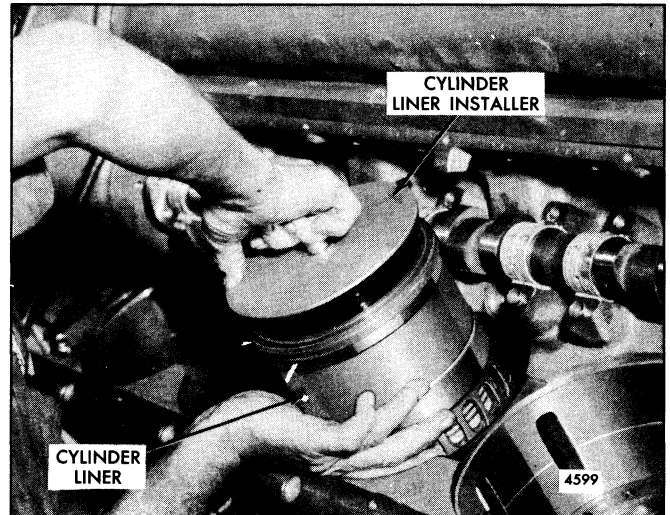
Installing Piston, Rod and Liner Assembly in Cylinder Block
